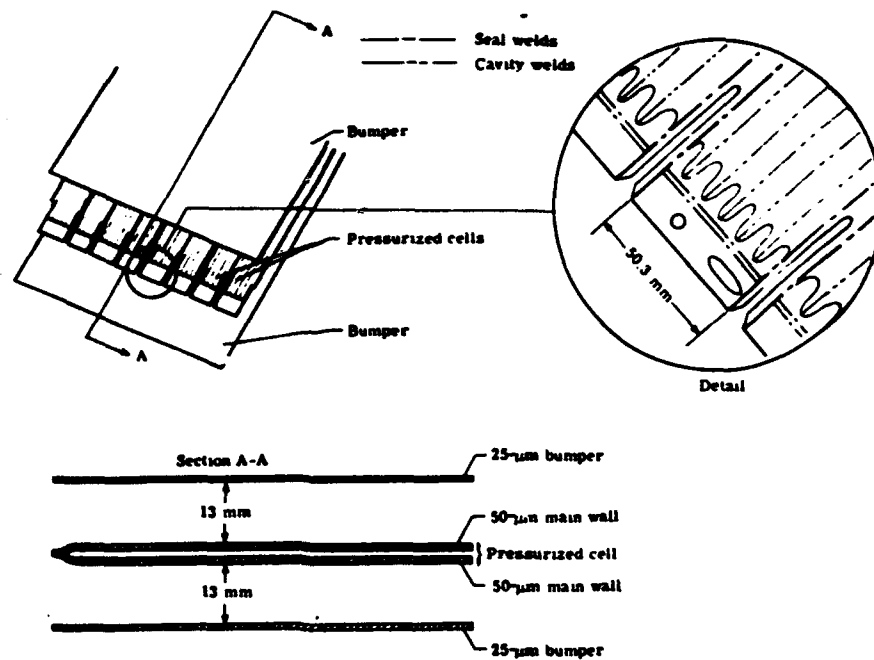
Drawing of panel with bumpers showing double-wall structure tested on Explorer 46. All material was 21-6-9 stainless steel.
